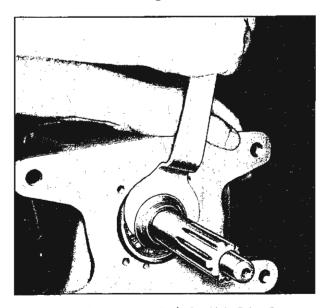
A–14 Removing or Replacing Main Drive Gear Retaining Nut
